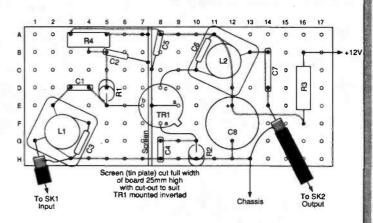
The overlay built on 0.1in. perforated matrix board.
